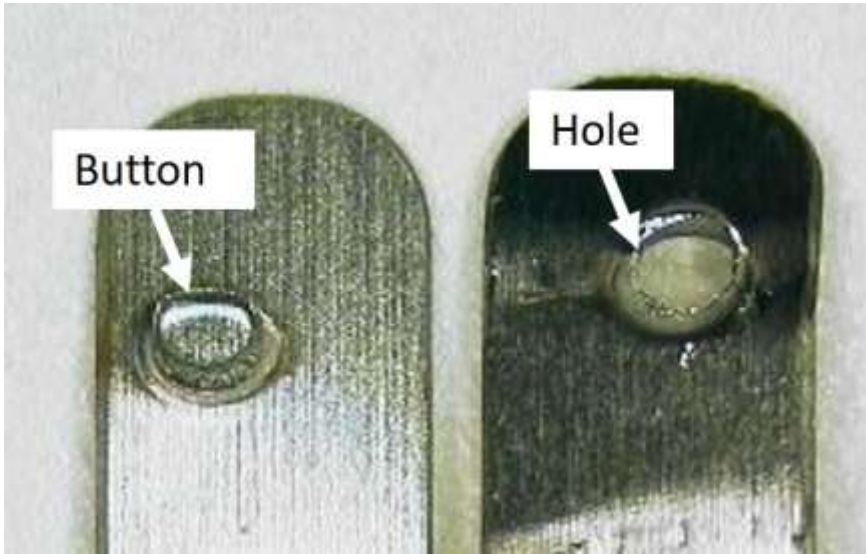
Photo above shows two resistance welded parts after testing to failure. A button is visible on the left and a corresponding hole is visible on right.
